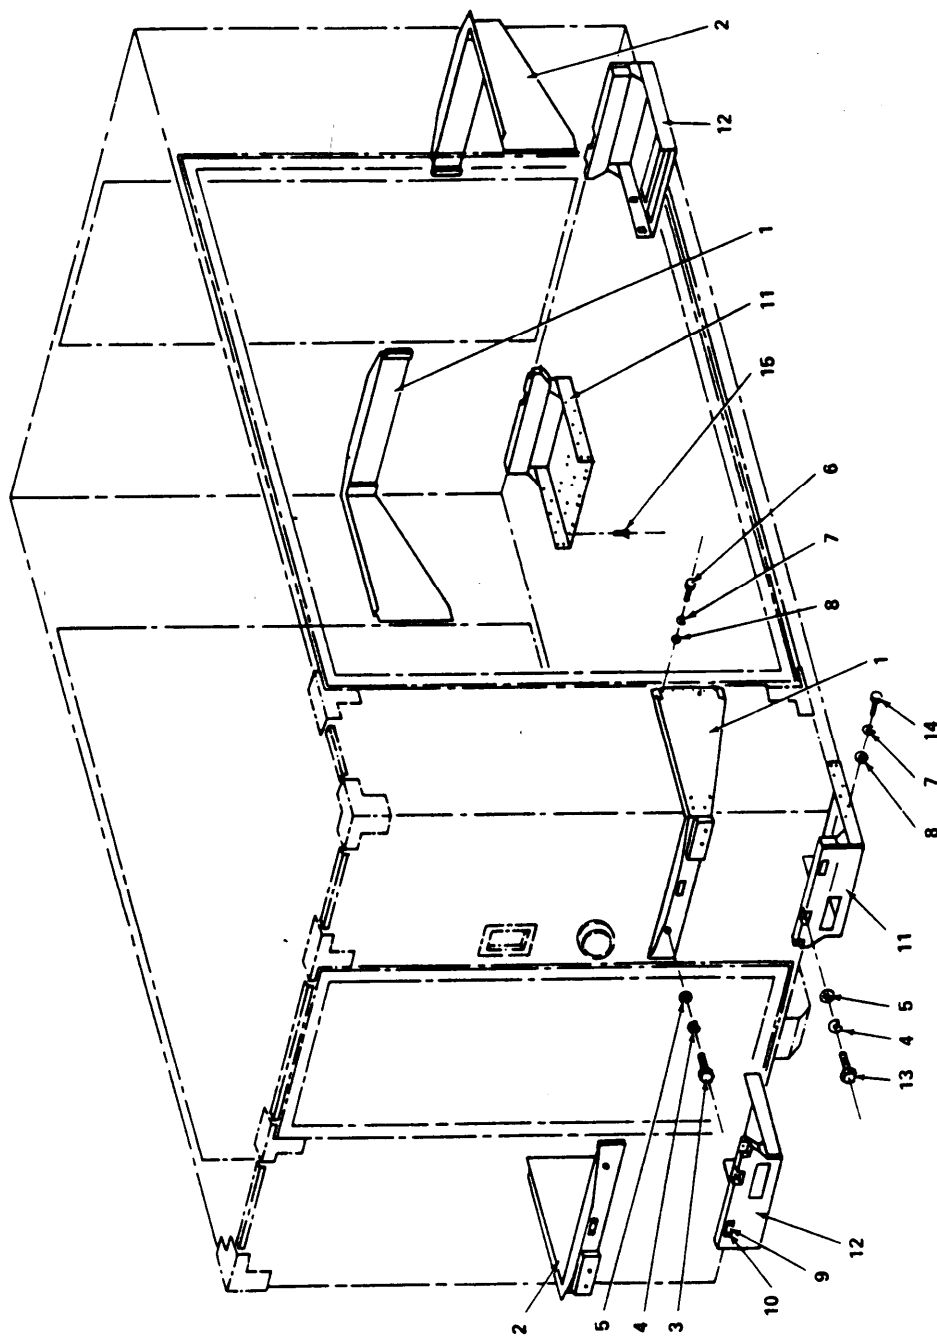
Dolly Adapter Kit, S-389 Shelter
